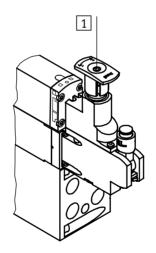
/5: Setting the pressure regulator plates with the aid of the adjusting screw
